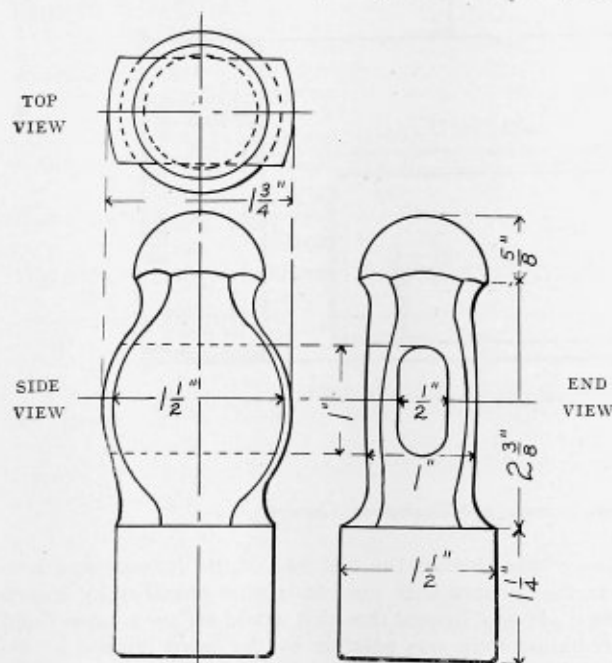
Working Drawing of a 1 1/2-Pound Hand Hammer
